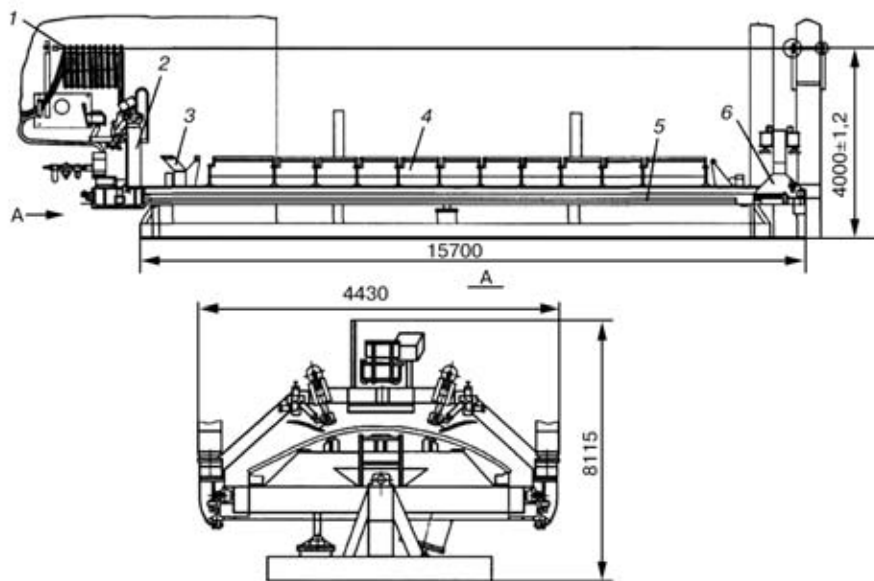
Installation for assembly and automatic welding of roof of the cement-carrying car: 1 — cable suspension; 2 — welding gantry; 3 — bracket; 4 — assembly bench; 5 — guides; 6 — assembly gantry
